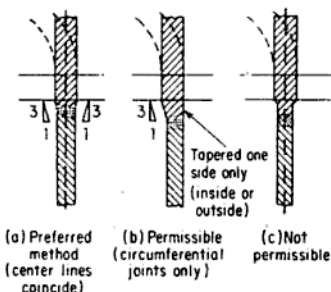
Butt welding of plates of unequal thickness.
